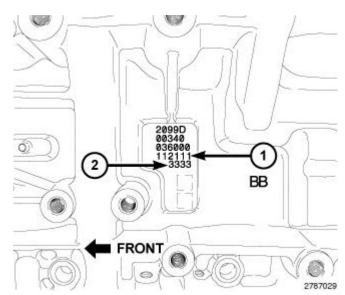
Engine Block Main Bearing Journal Diameter Grade Markings Courtesy of CHRYSLER GROUP, LLC
